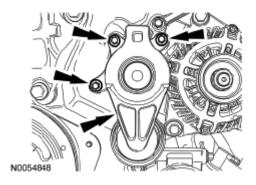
Locating Accessory Drive Belt Tensioner Bolts Courtesy of FORD MOTOR CO.
